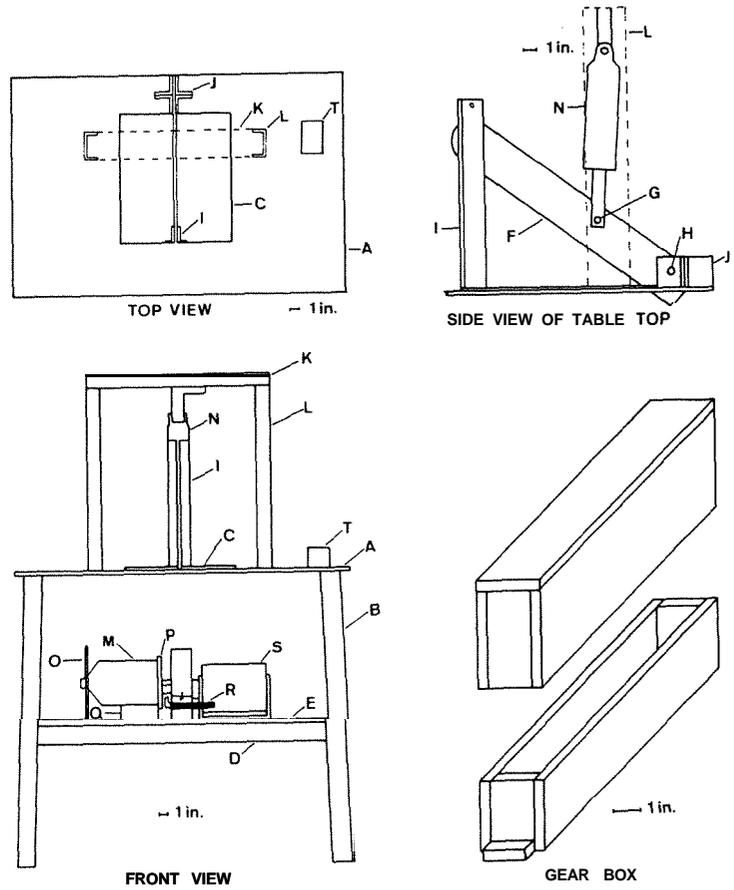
Assembly diagram for the hydraulic pine cone cutter. See table 1 for identification of lettered parts.
